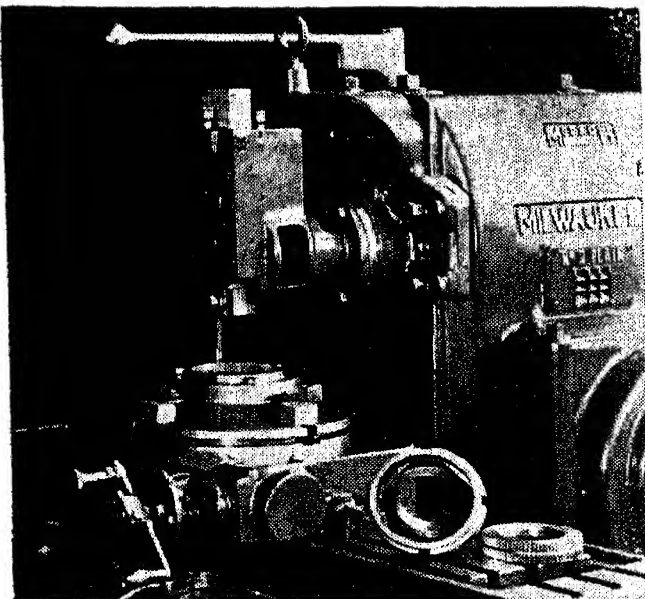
A slotting attachment applied to machining serrations in a workpiece. (Courtesy Kearney and Trecker Corp.)
